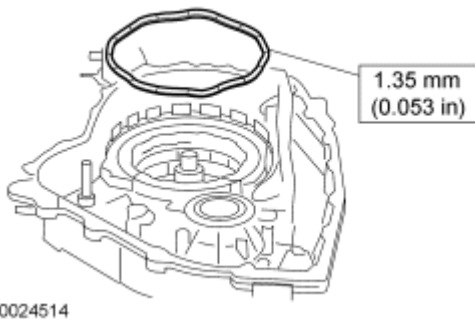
Identifying Thick, 10-Wave Low/Reverse Clutch Wave Spring With Specification
